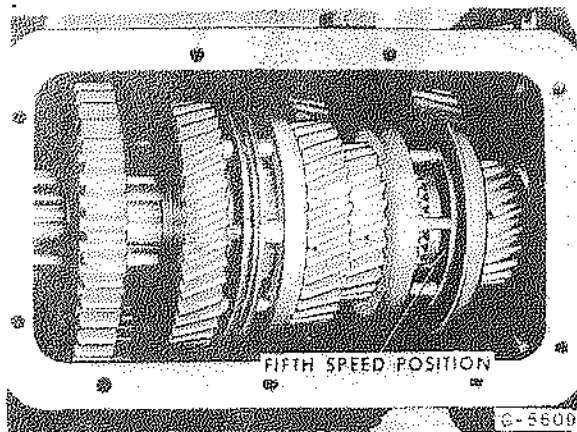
Synchronizer Positions With Transmission in Fifth Gear.
